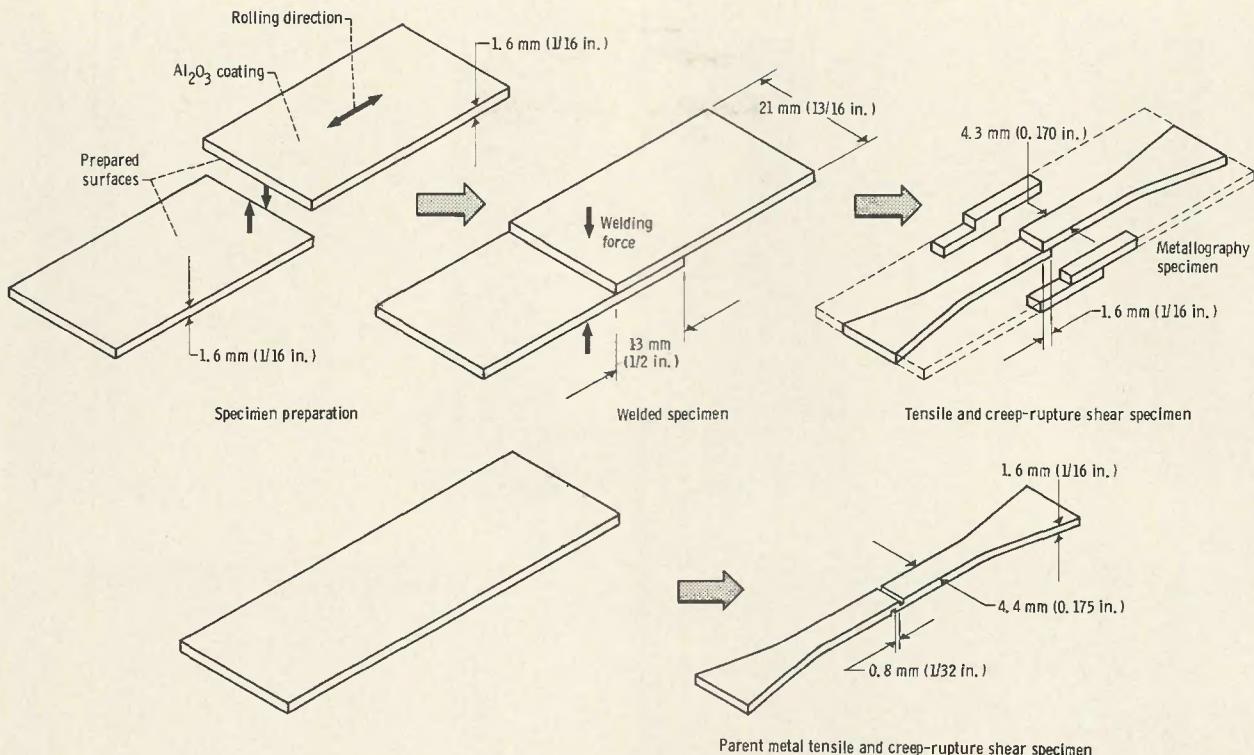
Weld specimen configuration and location of tensile-shear, creep-rupture shear and metallography specimens from weldment and parentmetal.
